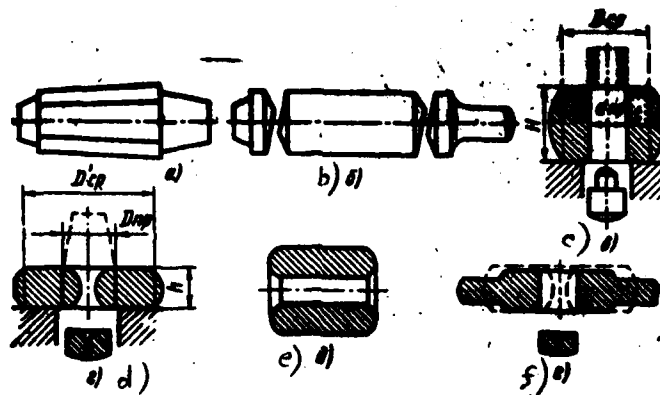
Diagram of new technological process of forging of turbine disks: a - ingot; b - blank; c - first upset and first broaching; d - second upset and second broaching; e - drawing on mandrel; f - upsetting, dispersal of blade and broaching of finished forging.
